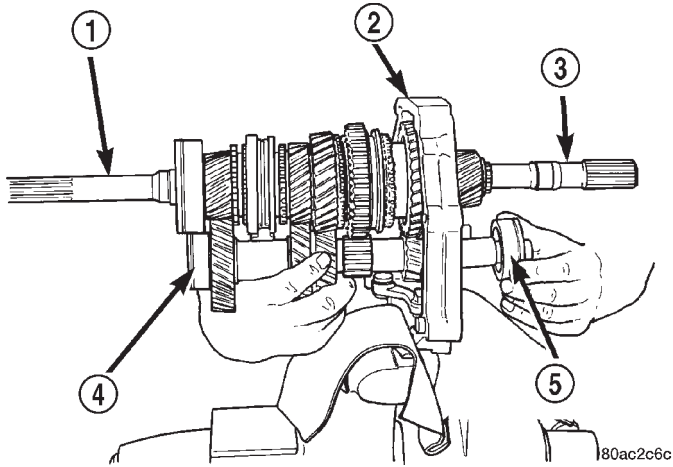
Remove Countershaft and Countershaft Rear Bearing
